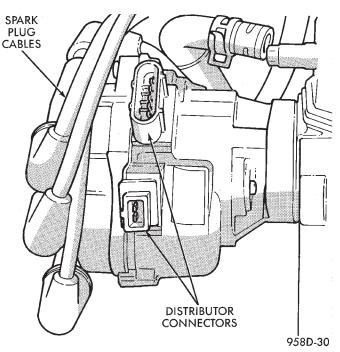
Distributor Electrical Connectors—Viewed From Rear of Distributor
